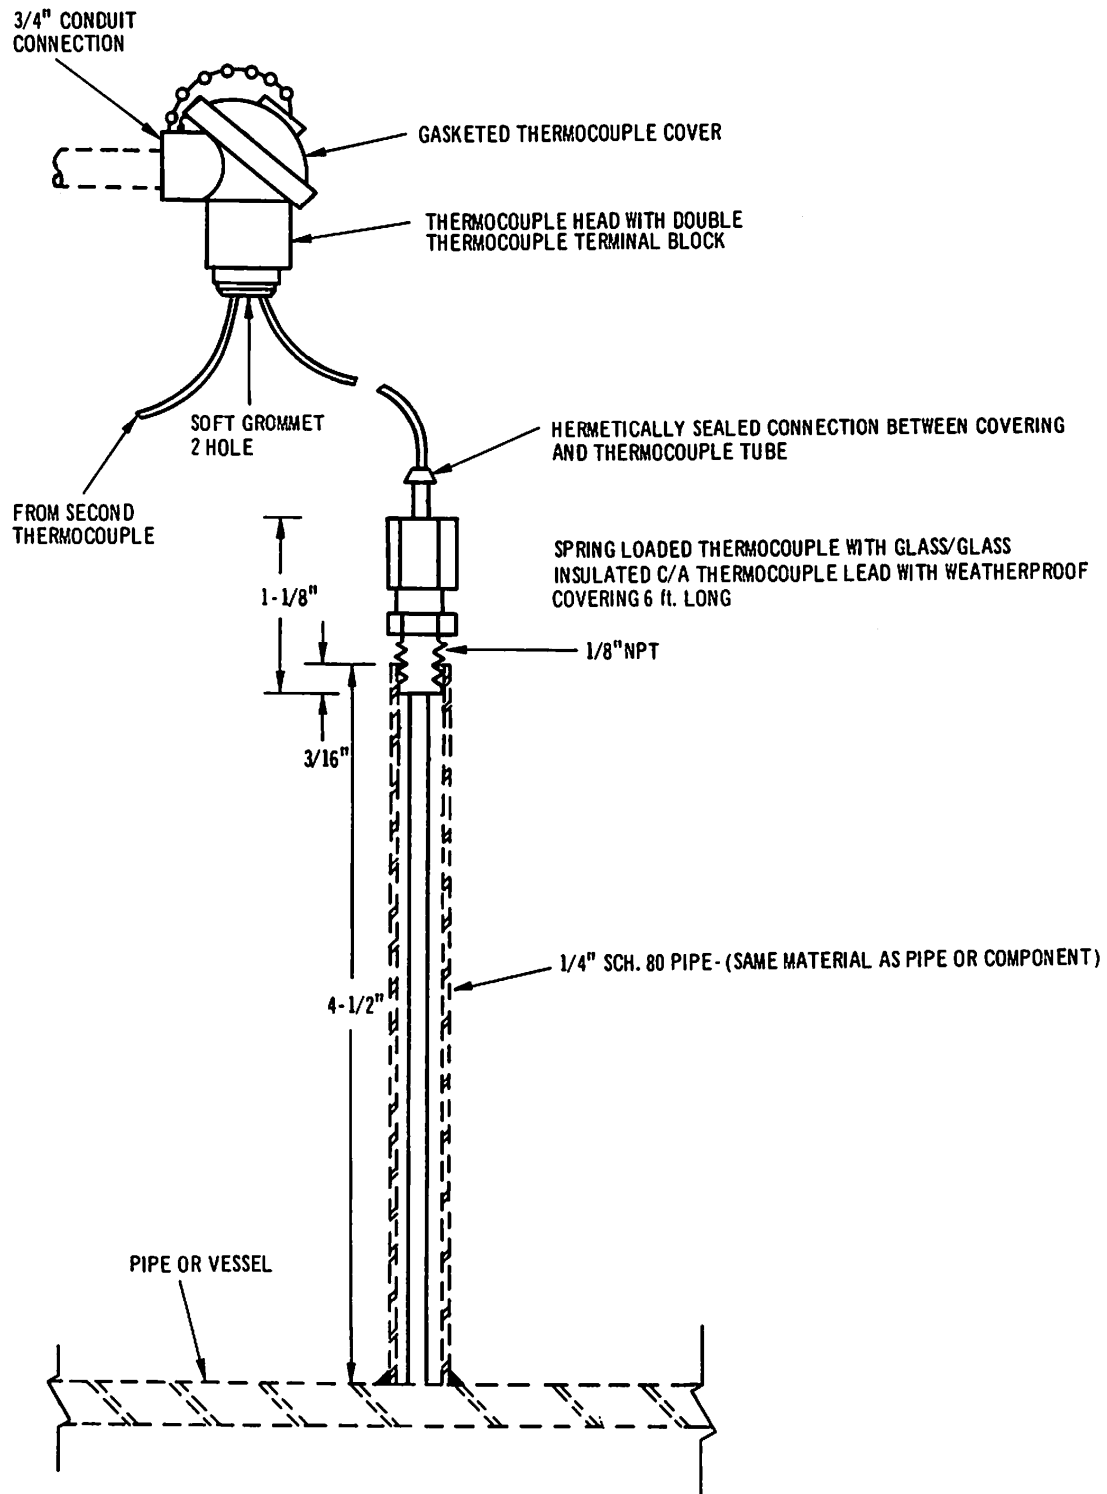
Figure 6.9-3 Pipe Surface Thermocouple Mounting [Vol. II, Chapter 6, p.6.9-6]
